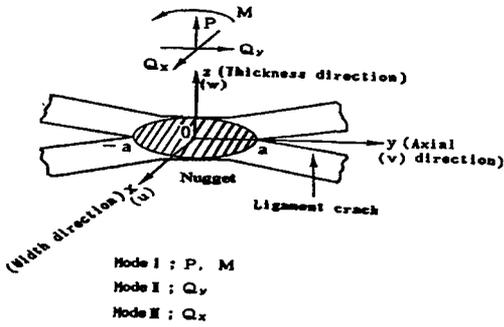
Mechanical model of IB type spot-welded lap joint
